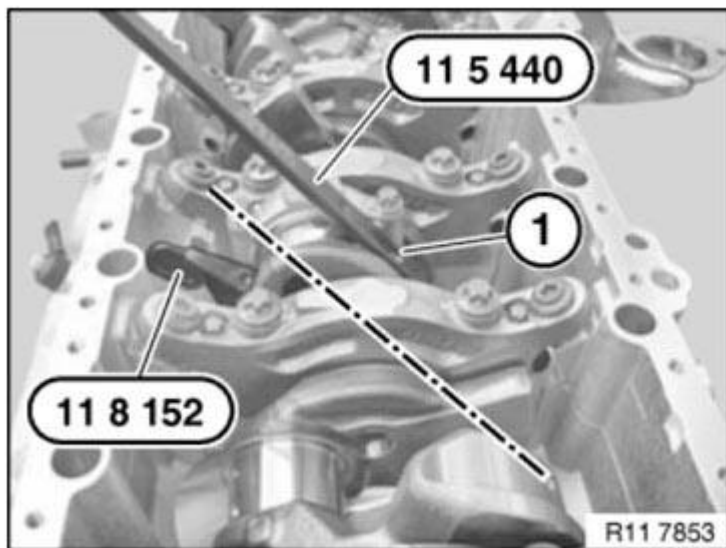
Removing Conrod With Piston From Cylinder Head Side
